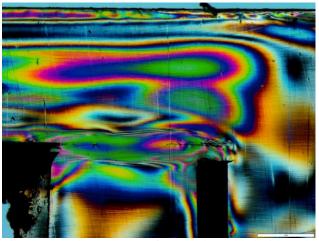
Melt Zone Image for Sample Welded with Weld Velocity 0.5 mm/sec photographed in polarized light.
